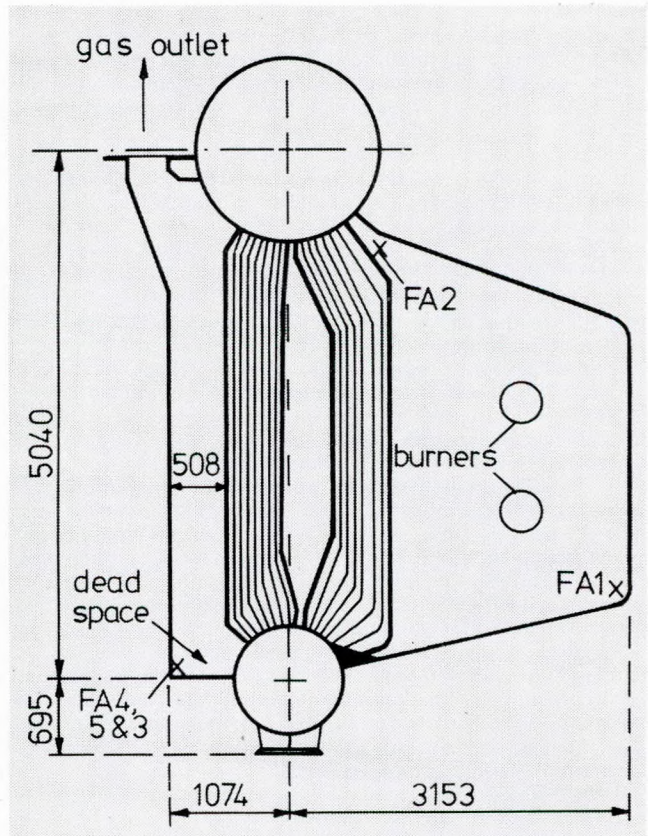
Simplified sectional elevation of auxiliary boiler modelled (full-scale dim. in mm) showing full-scale sample points
